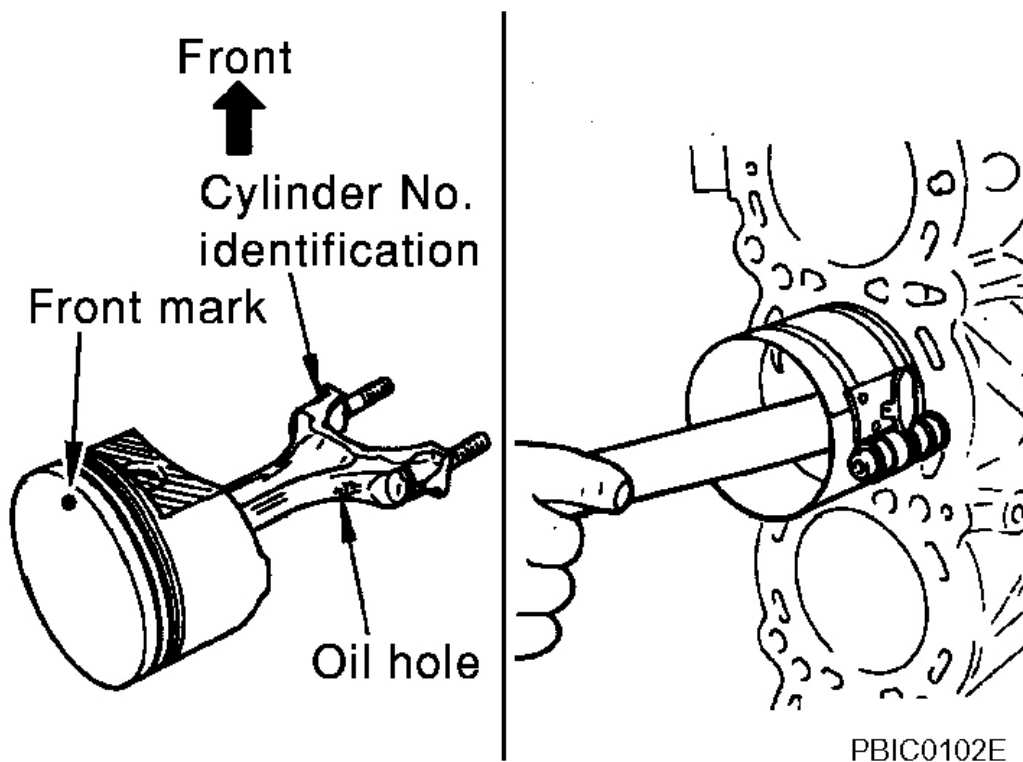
Installing Piston And Connecting Rod Assembly To Crankshaft
